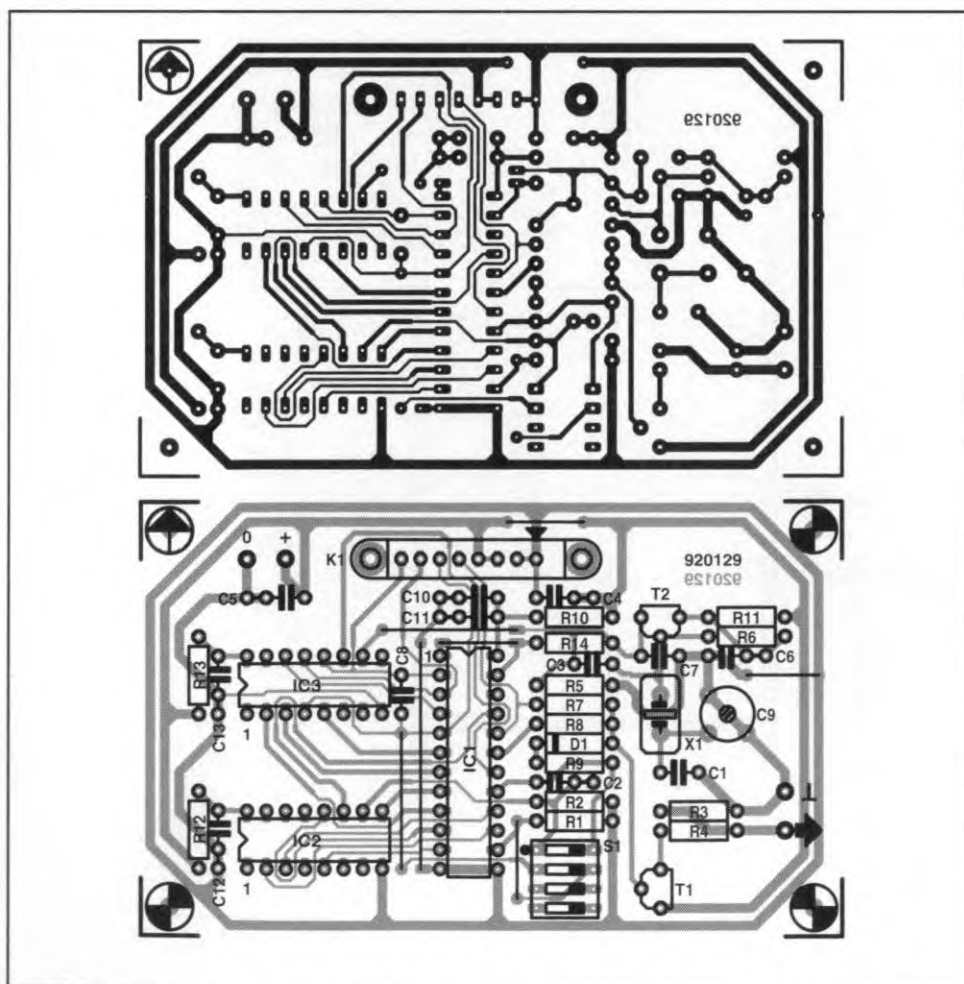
Track layout (mirror image) and component mounting plan of the printed circuit board designed for the test pattern generator.
